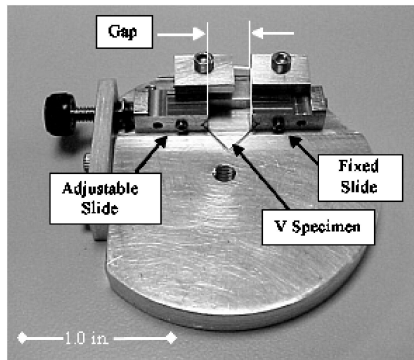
Fatigue simulation fixture with mounted V specimen.
